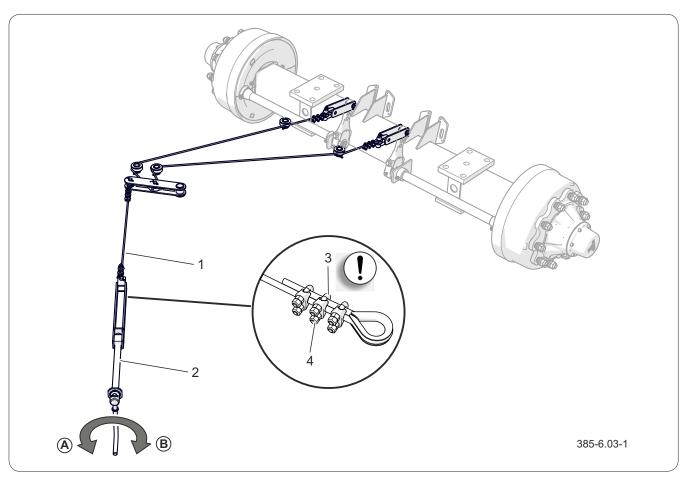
Parking brake cable replacement (1) cable (2) brake mechanism
